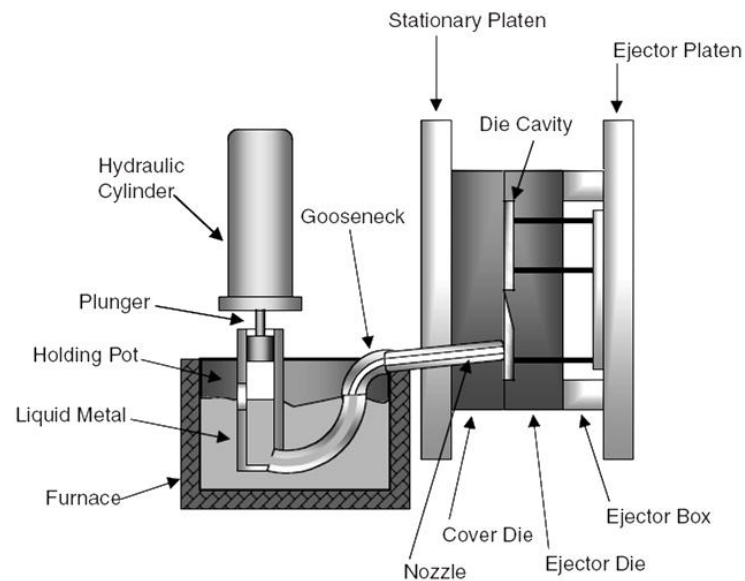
Graphical illustration of a hot-chamber die casting machine [3].
